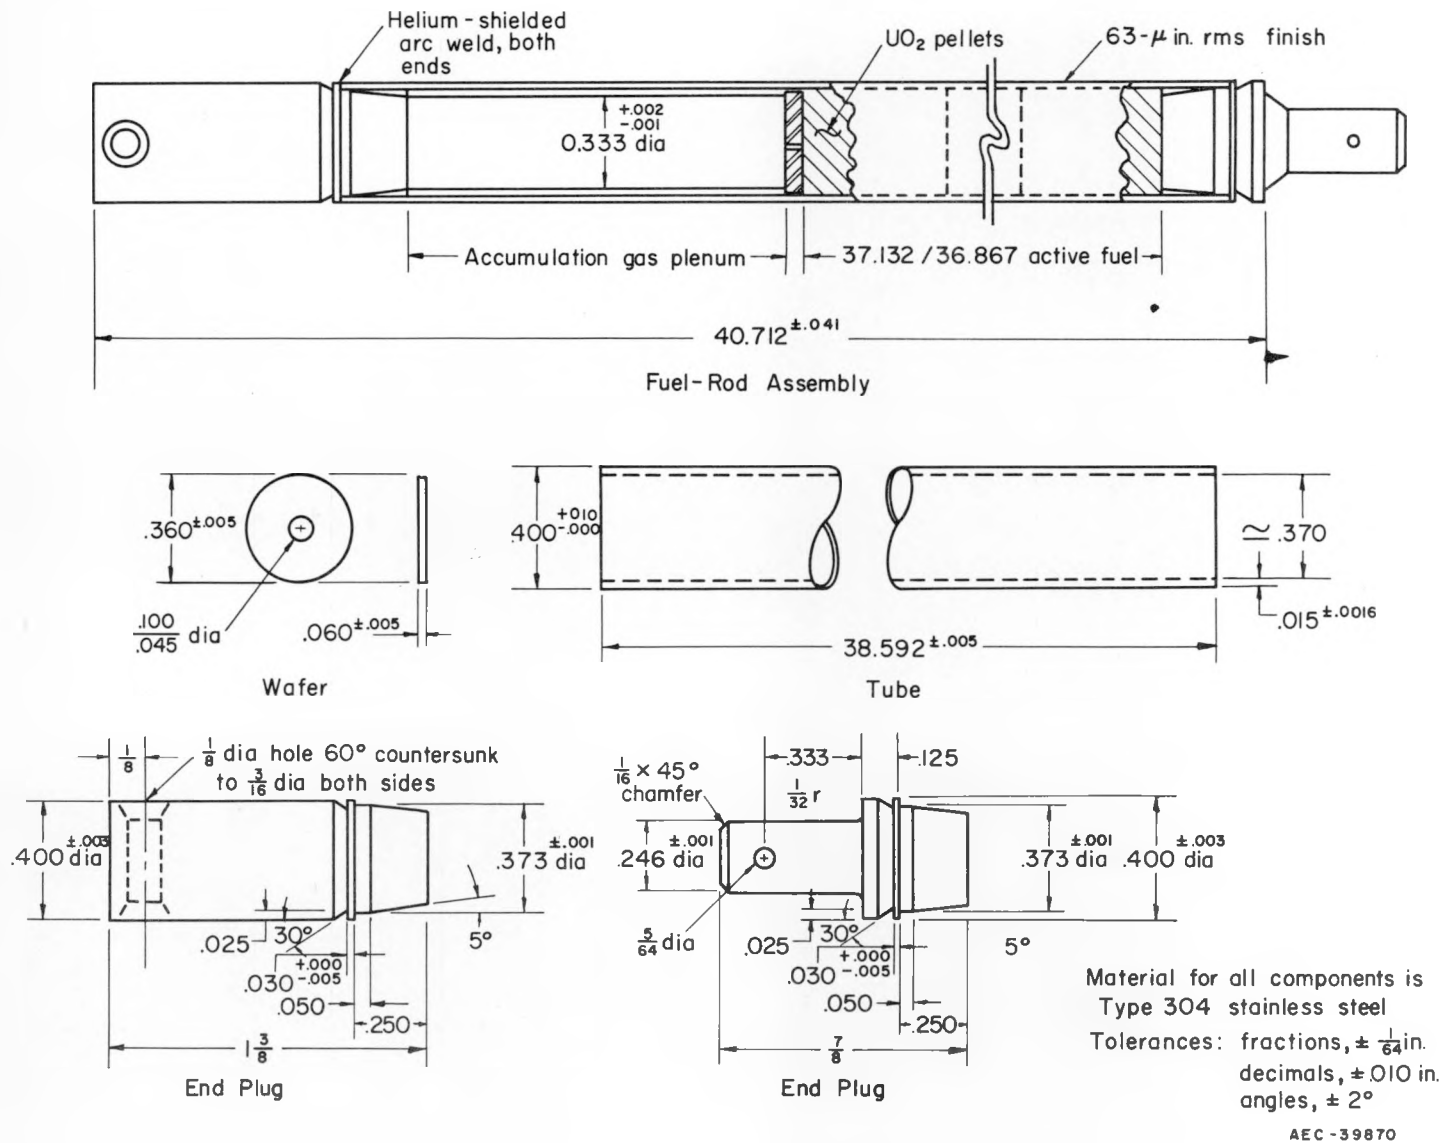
DRAWINGS FOR PELLETIZED UO₂ FUEL ROD FOR IRRADIATION TESTING IN THE VBWR
